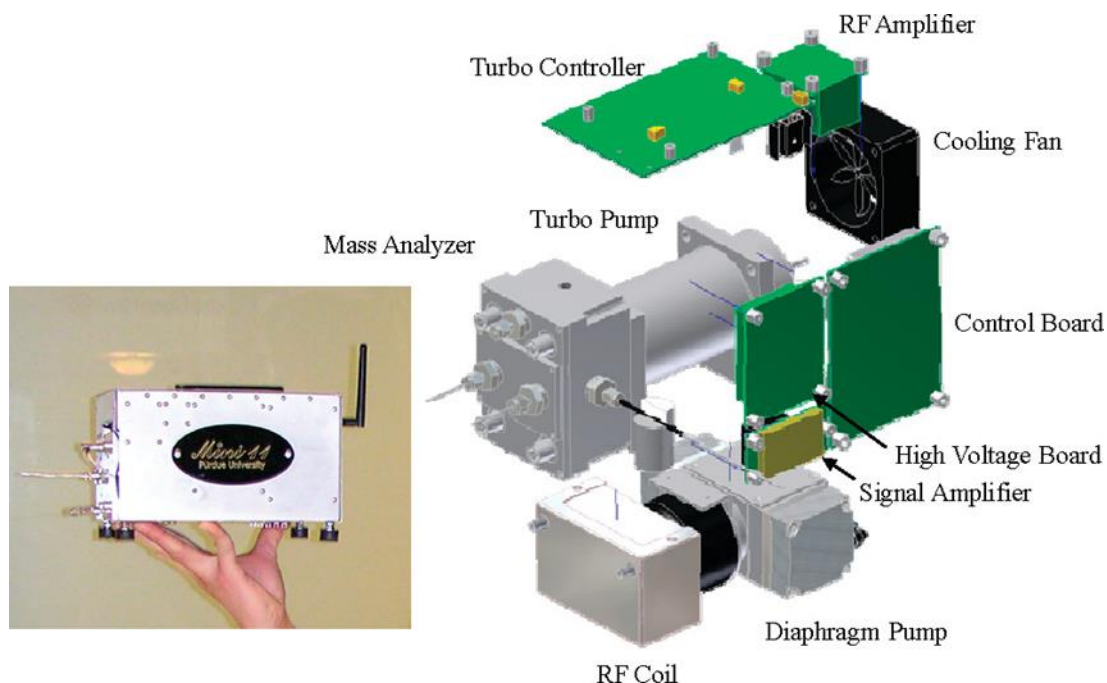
Exploded view of Mini 11 mass spectrometer and its components.
